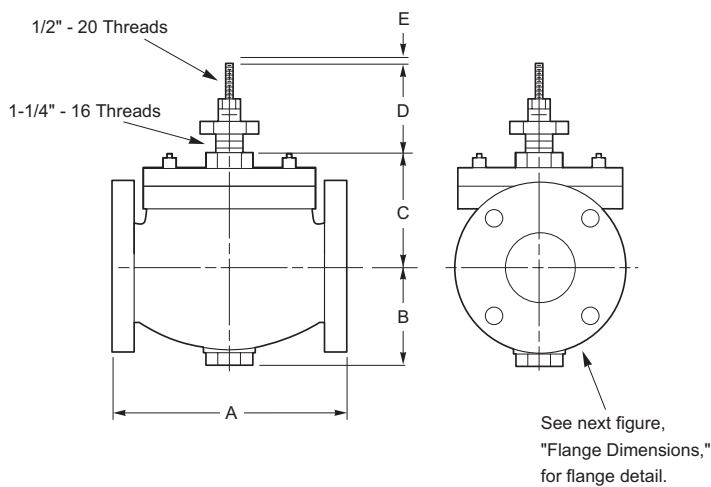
Typical of VB-8223-0-5-P 2½"...6" Valve Bodies
